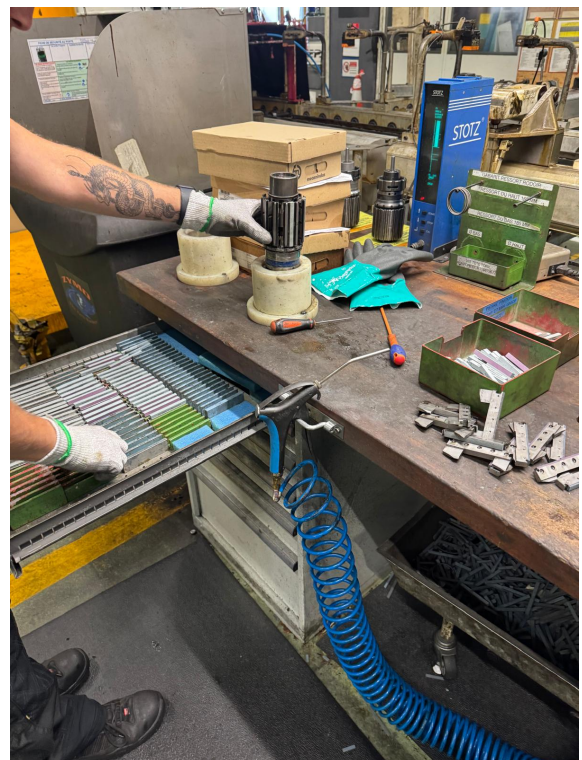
Honing stone preparation station: honing tool spring gauge (top spring, 165 mm; bottom spring, 185 mm), a box of finishing stones sorted by shade, and a compressed-air blower.
